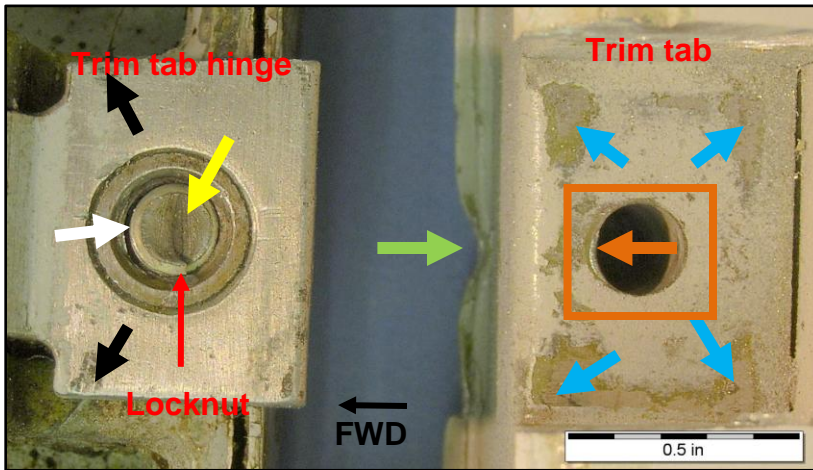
The mating surfaces of the inboard trim tab hinge and the trim tab.
